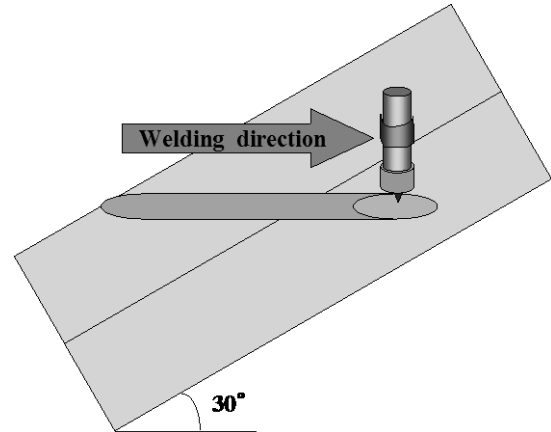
Test arrangement with weld diagonally crossing the butt line.
